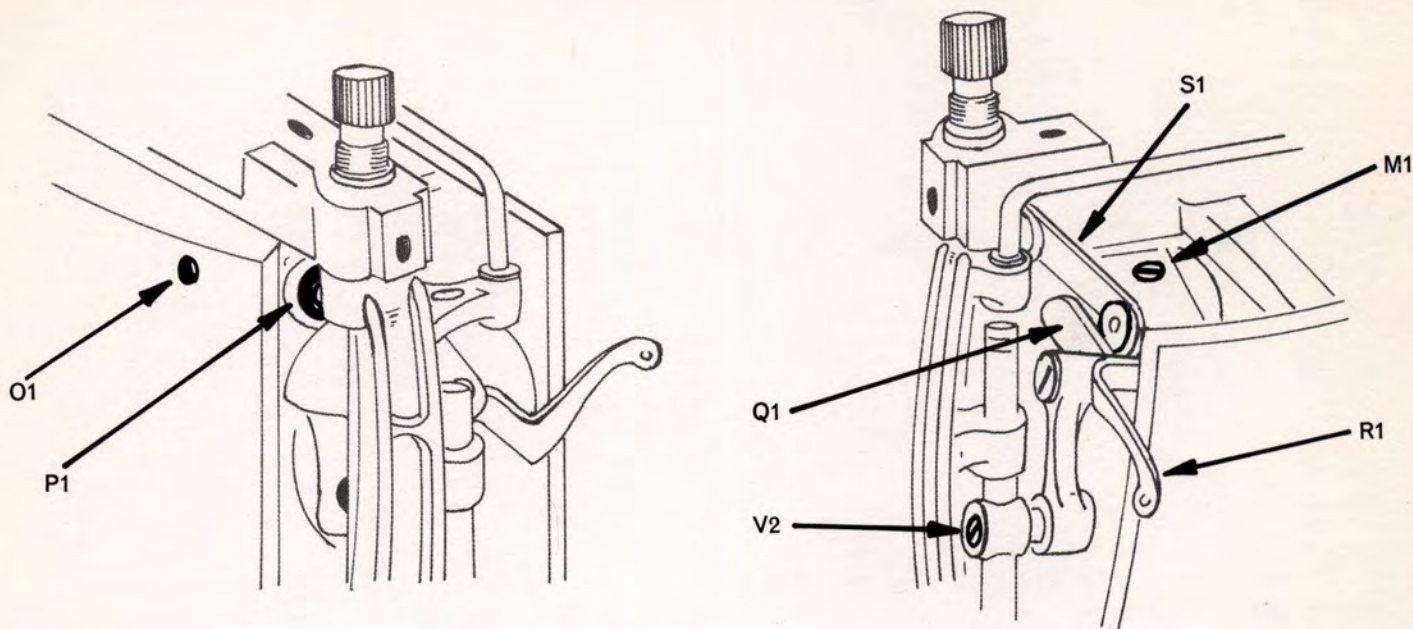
Thread Take-up Mechanism to Eliminate End Play or Binding in Thread Take-up Mechanism.
